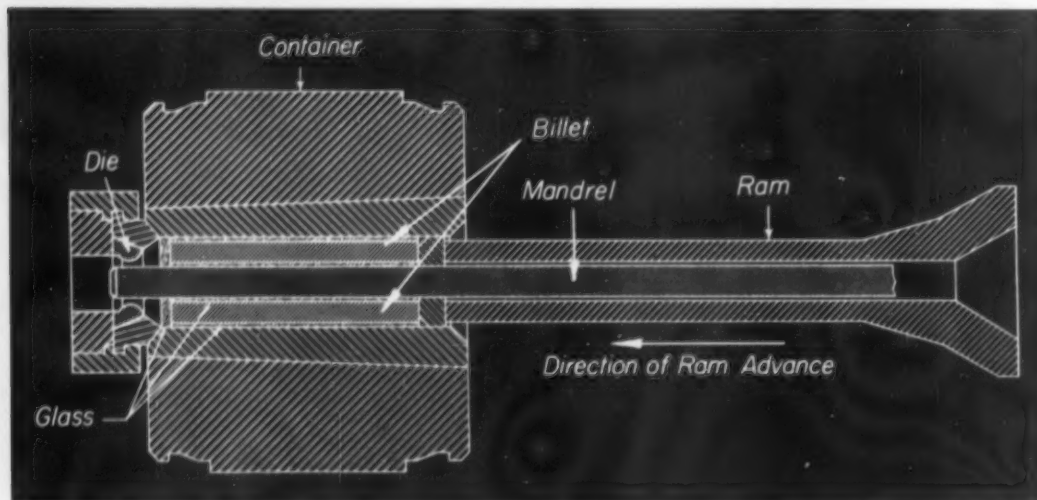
Glass Lubricated Surfaces for Extrusion of Tubes
